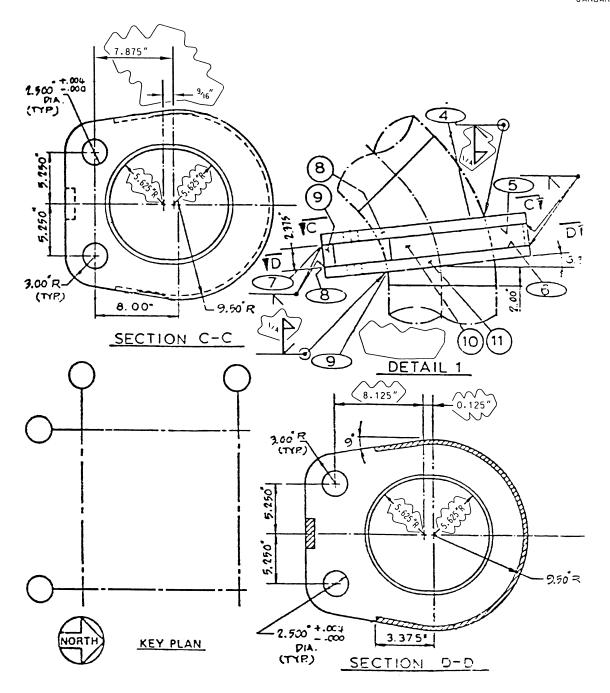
(Q & R 210.01) SRV DISCHARGE LINE SUPPORT WELDED ATTACHMENT DETAIL
